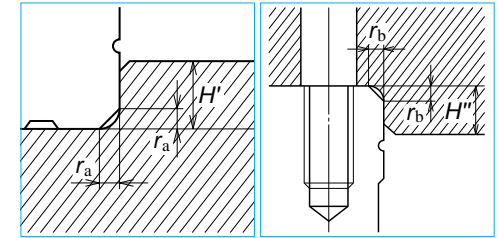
Shoulder for the rail datum face Fig. 9.11 Shoulder for the slide datum face
